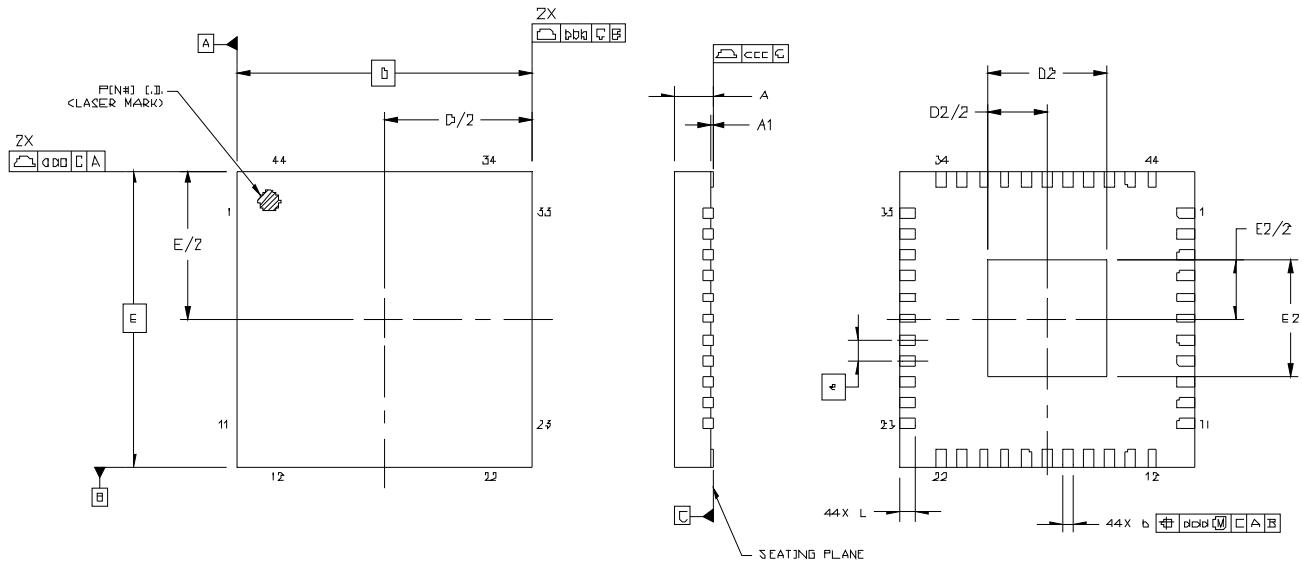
Si53302 7x7 mm 44-QFN Package Diagram
